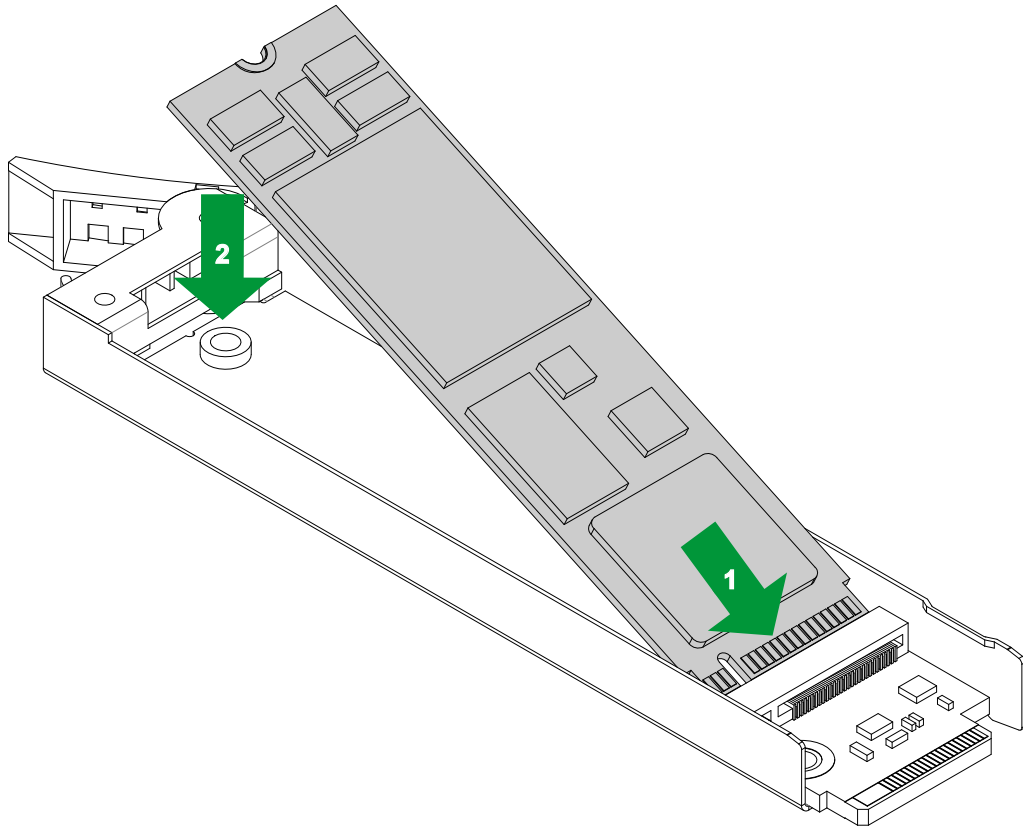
Insert the M.2 Drive Into the AOM-PN-4NM Adapter Board
